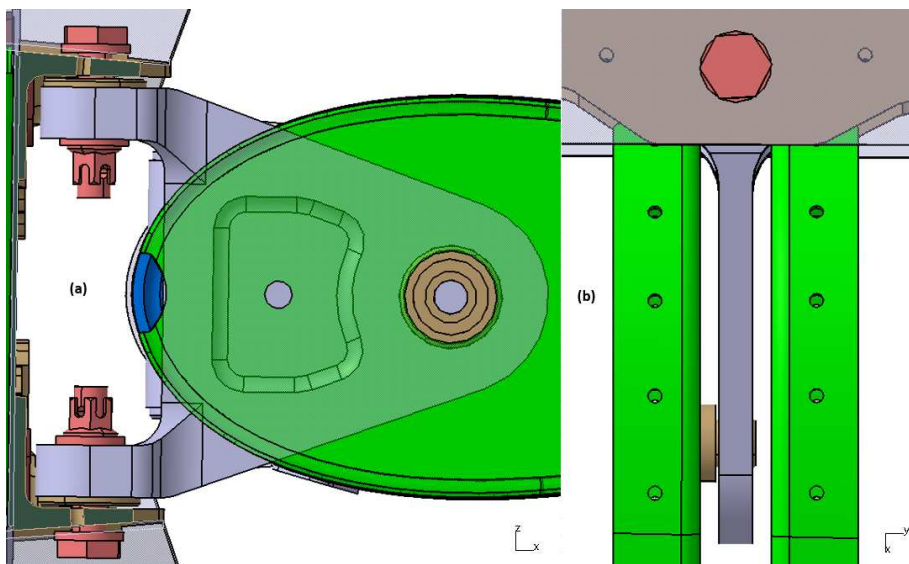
(a) Side-section view of the assembly, (b) Top view of the assembly according to aircraft coordinate system
